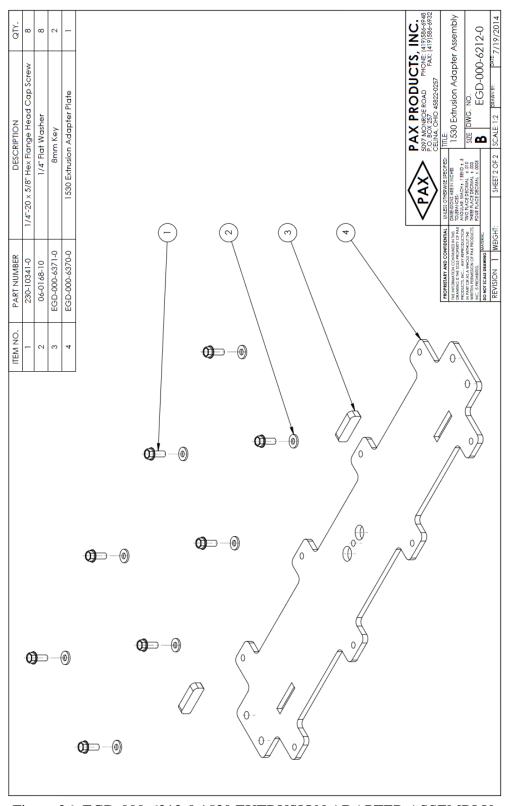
EGD-000-6212-0 1530 EXTRUSION ADAPTER ASSEMBLY
